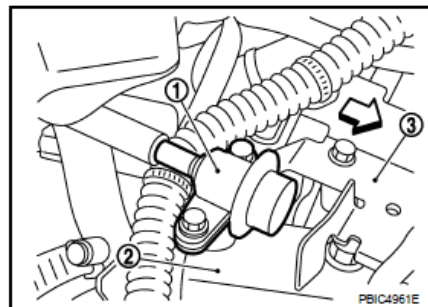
Removing Fuel Feed Hose (With Damper) From Fuel Sub-Tube And Harness Bracket
